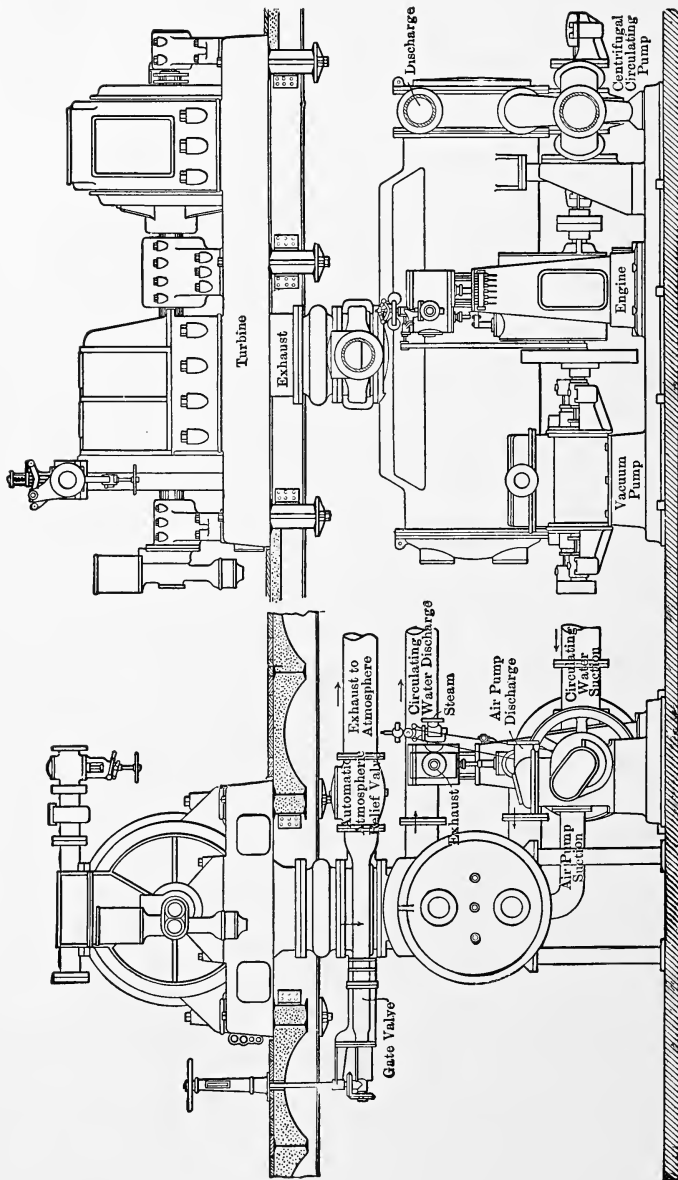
C. H. Wheeler Company's High-vacuum System.
